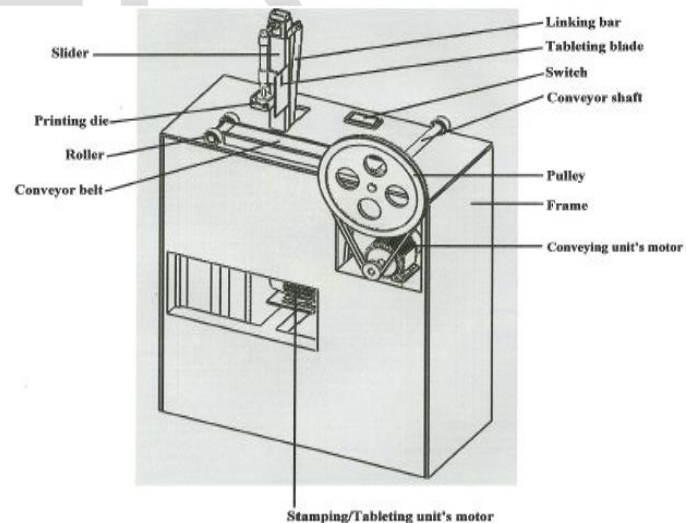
Improved-motorized soap stamping and tabulating machine [7]
